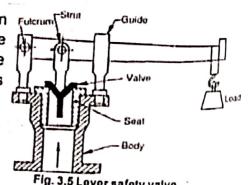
Lover safety valve material, rusting is considerably reduced. The thrust on the valve is transmitted by the strut. The guide keeps the lever in a vertical plane. The load is properly adjusted at the other end of the lever.
